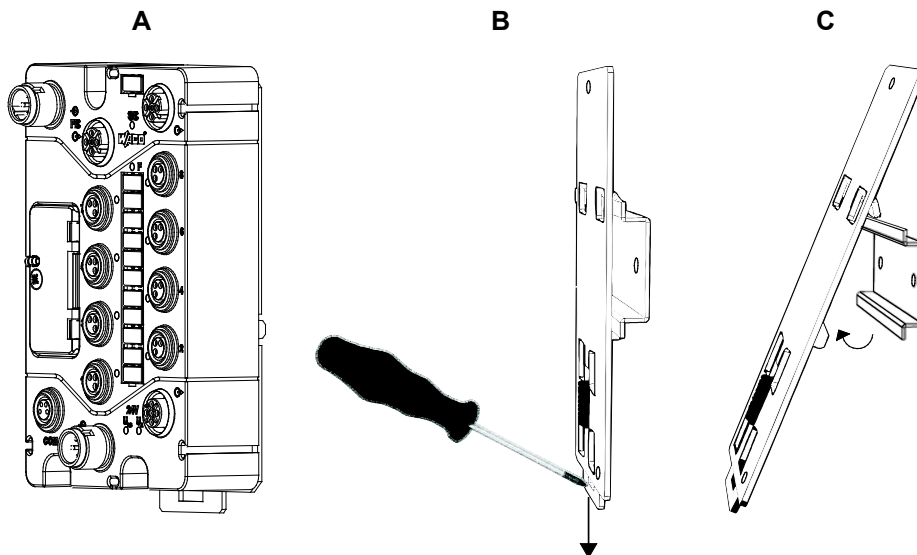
Removing the fieldbus coupler (with the mounting rail adapter) from the mounting rail
